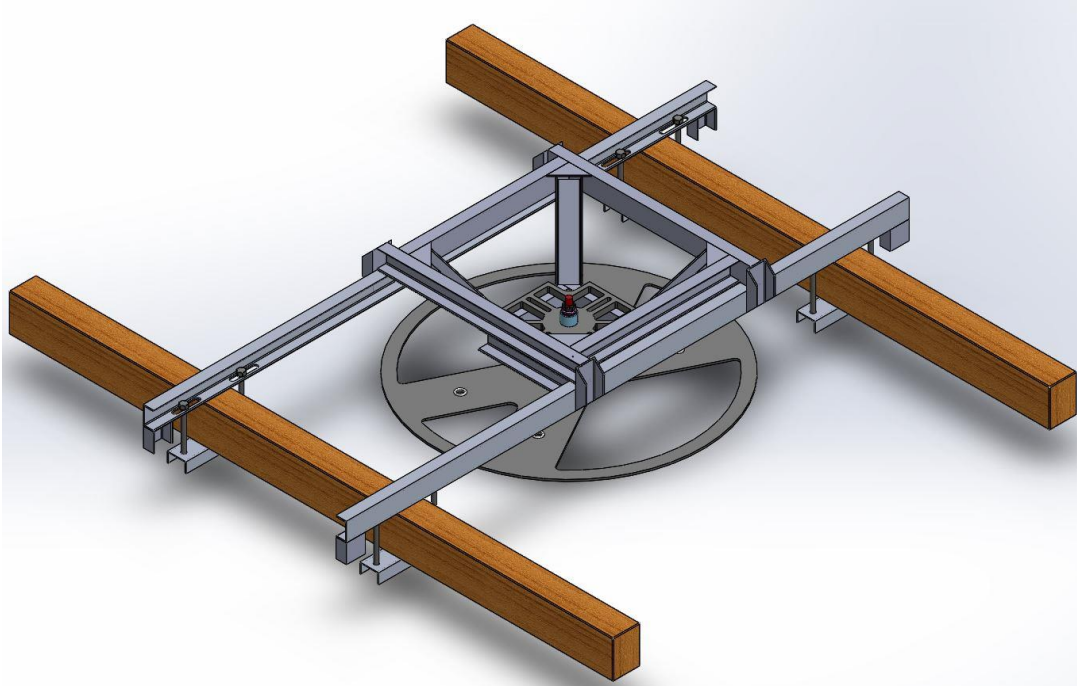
D CAD model of the Suspension and Rotation Framework Assembly(ISO View)
